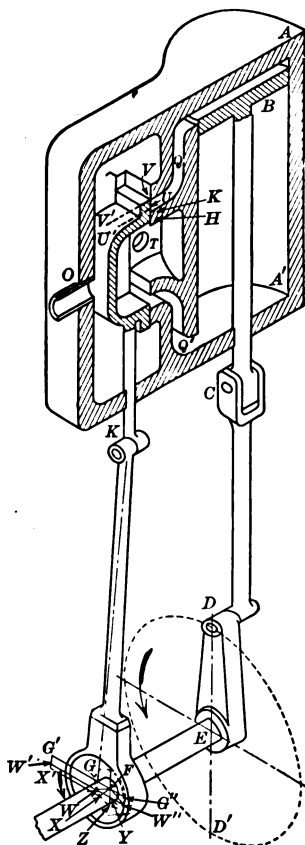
(Duplicate).—SHOWING VALVE WITH STEAM LAP
